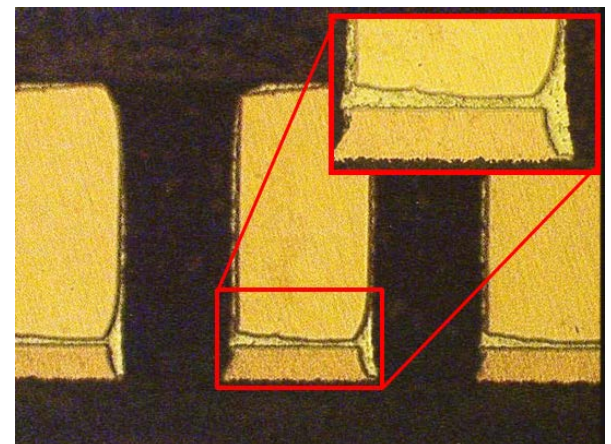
ST4/SS4 Connector, Pb Free, Typical Solder Joint
